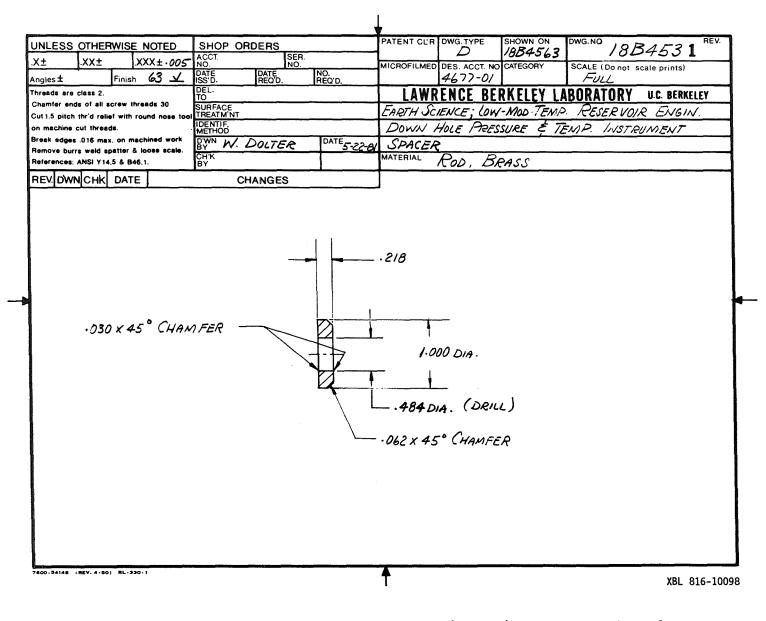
Detail drawing of the spacer (Item 4) for the geothermal cablehead.
